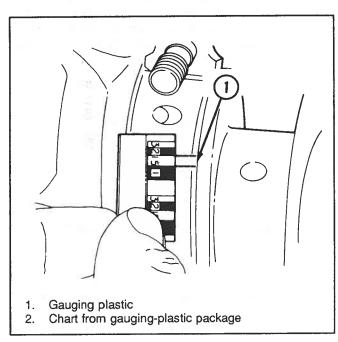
Measuring Bearing Clearance With Plastic Gauging Material
